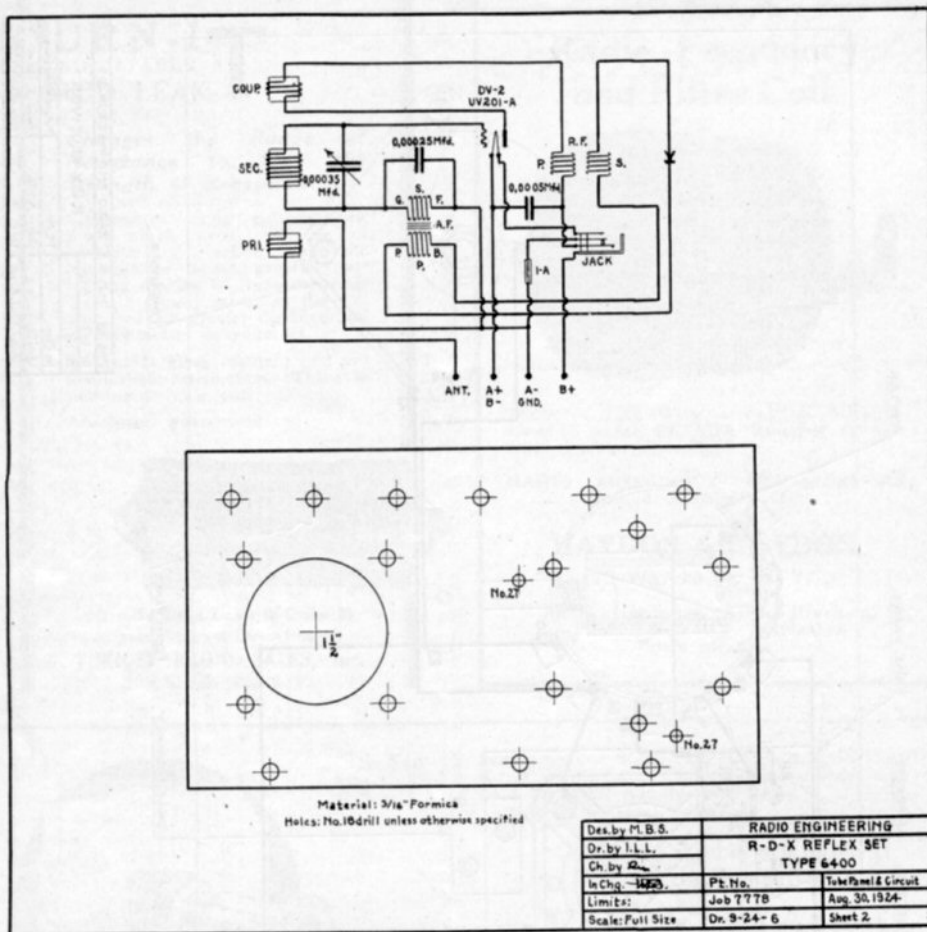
Schematic diagram and one-half scale drawing of the tube panel.
